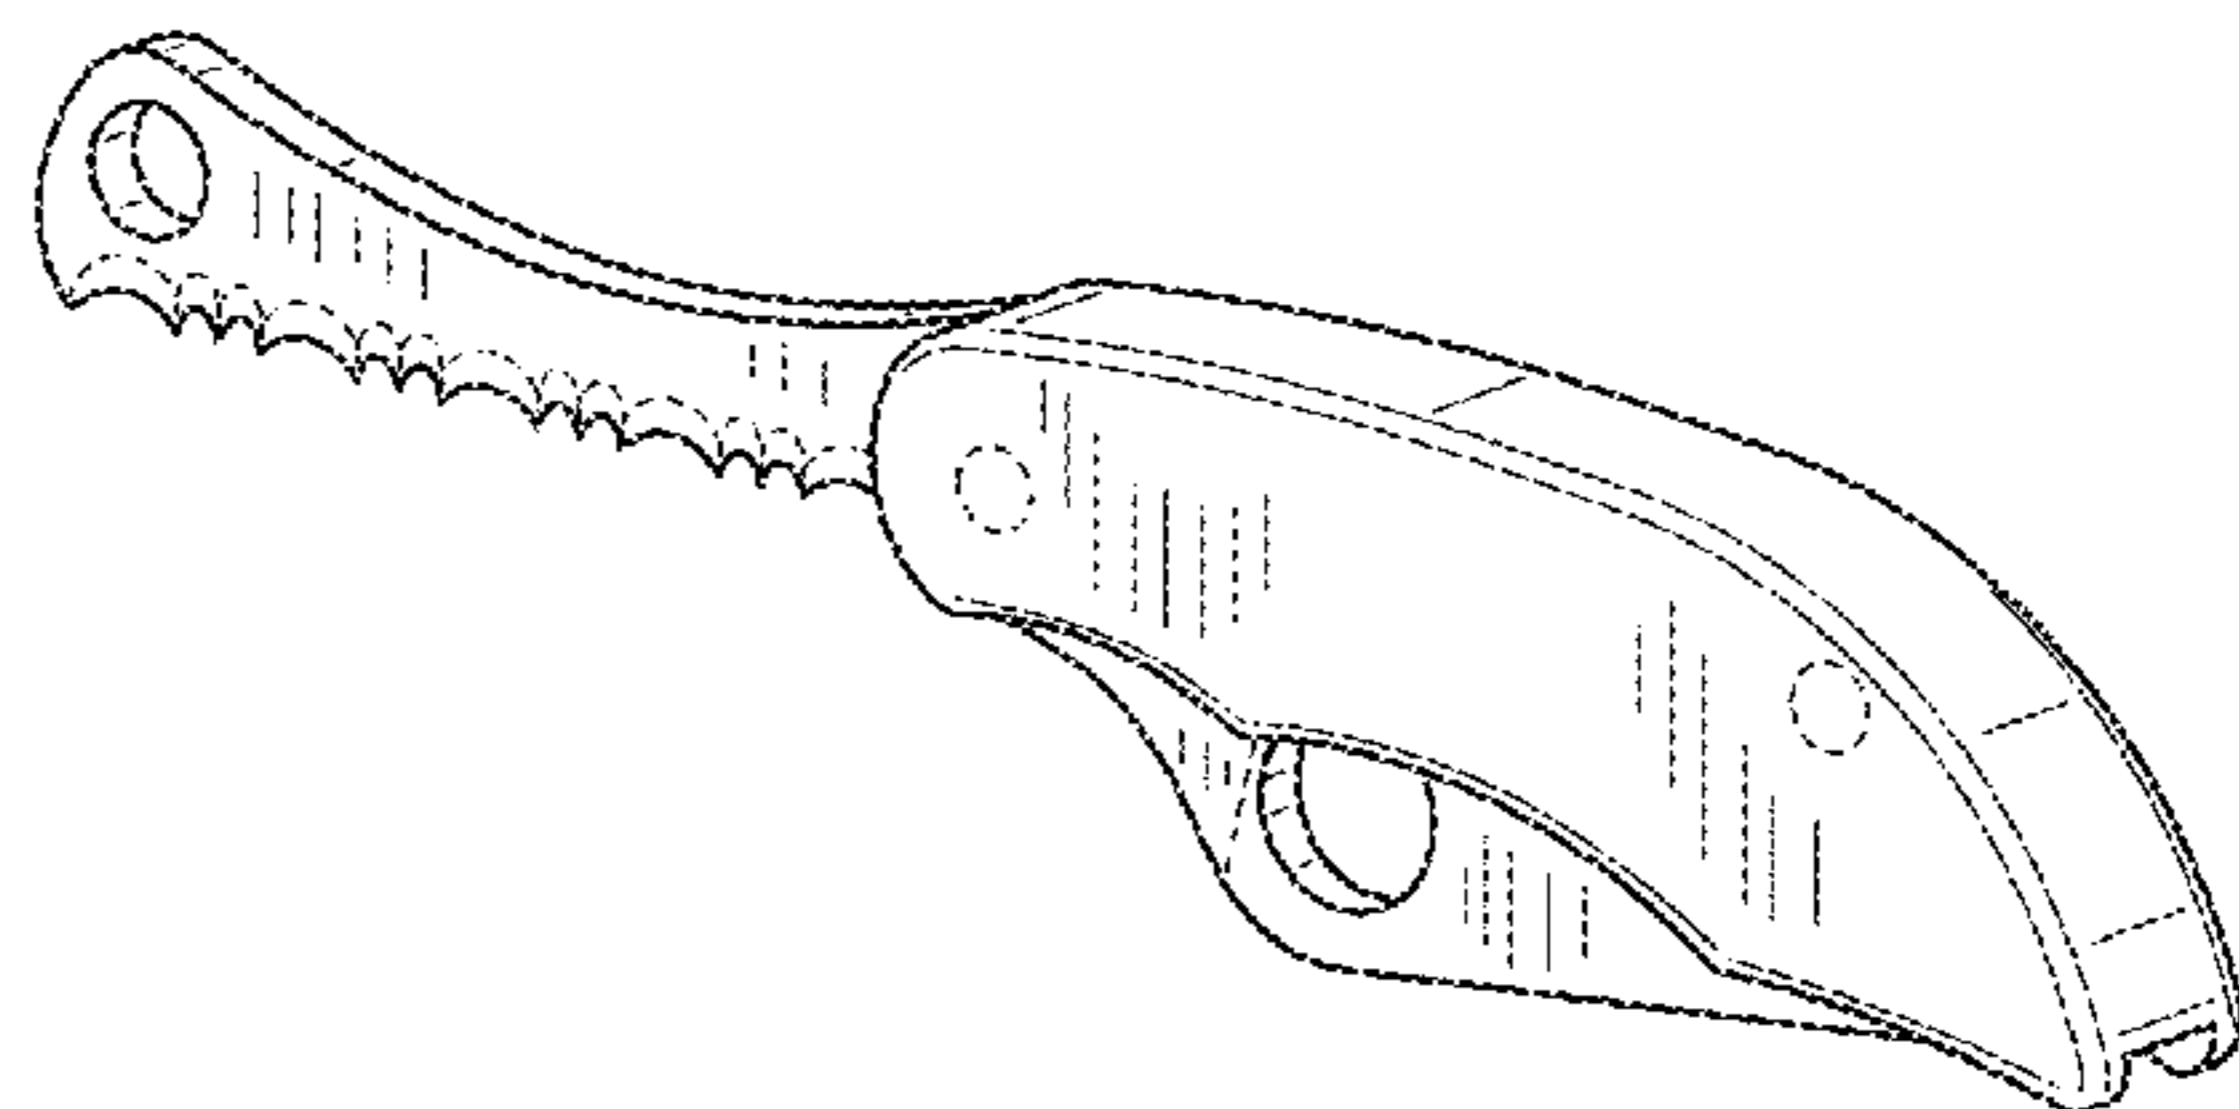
is a front perspective view of the dual blade folding knife with one blade shown in an open position;
